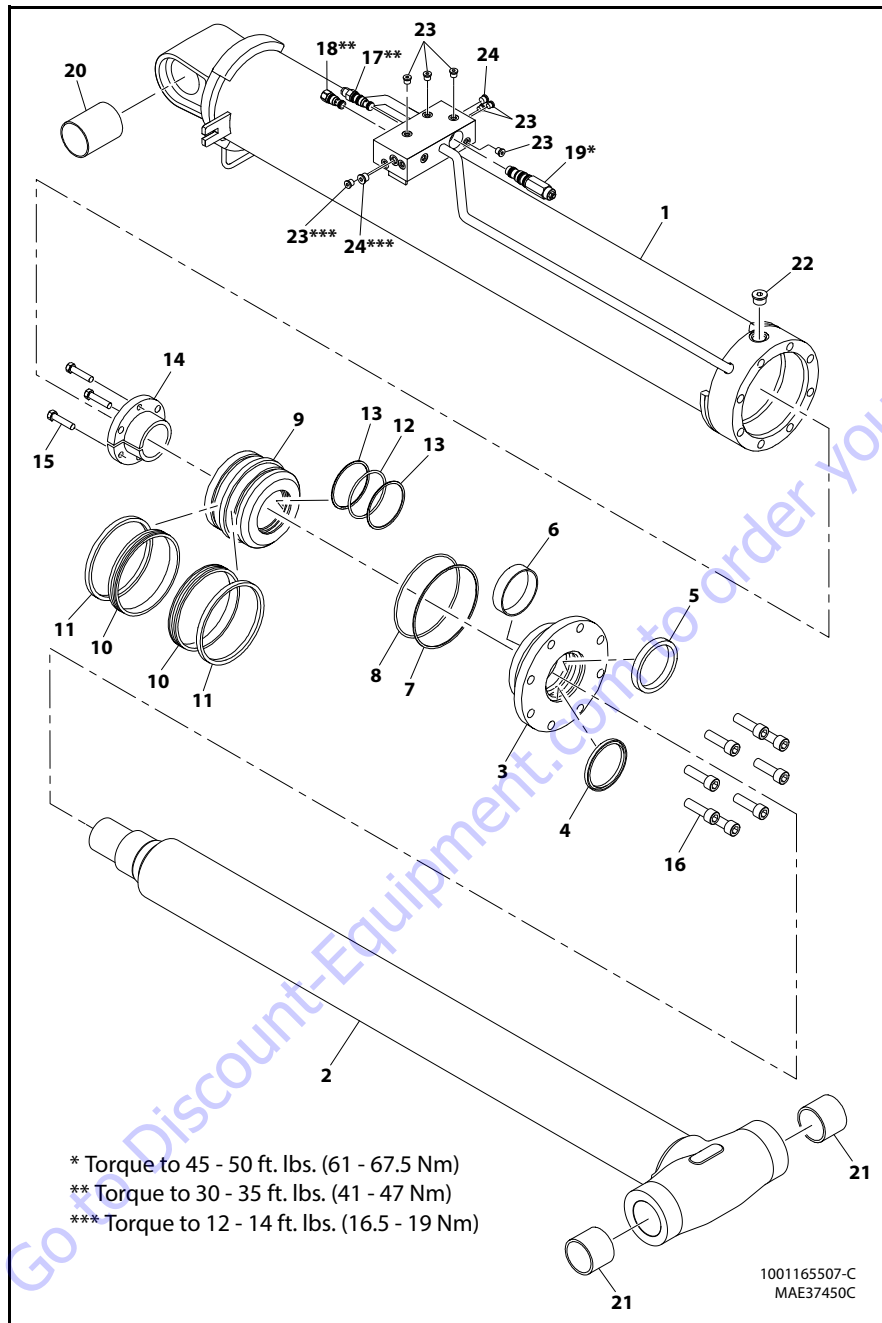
Platform Level Cylinder (SN 0300238007 to Present)
